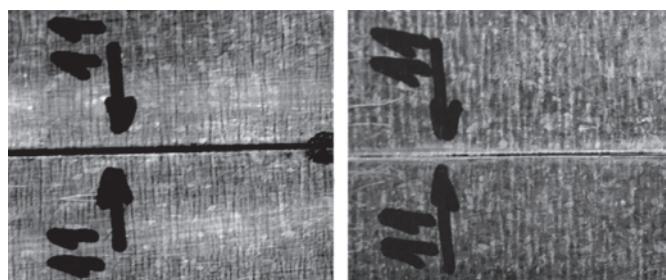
Visual aspect of the weld: top surface joint root (pulsed laser welded Zn coated thin metallic sheets).
